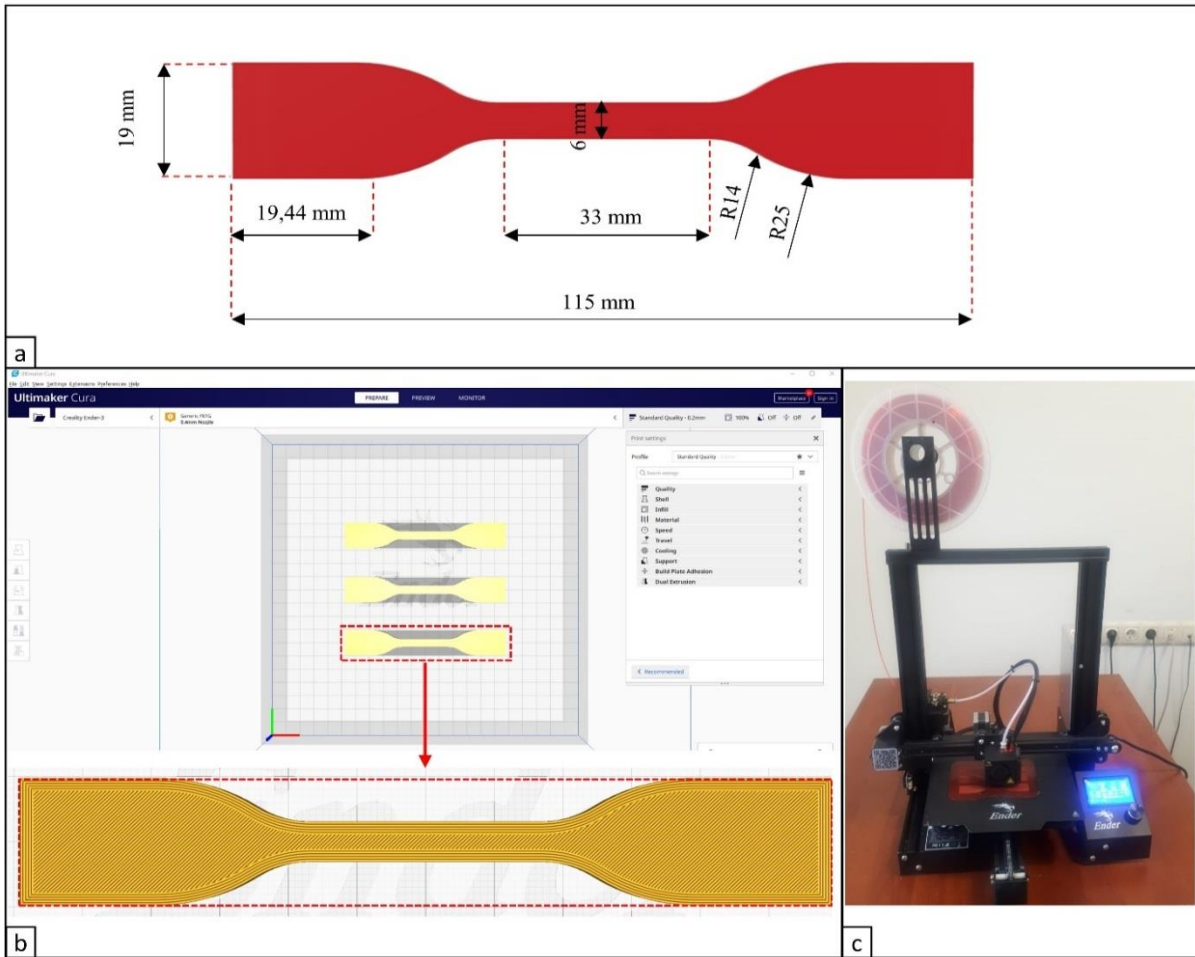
ASTM standard for tensile test specimens and manufacturing steps, a) Dimensions of the tensile test specimens according to ASTM D638-14 Type IV, b) View of the specimens in slicing program, c) Real view of the 3D printing process
